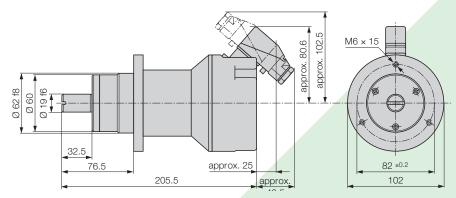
KINAX WT 707 with additional gear and plug-in connector.
